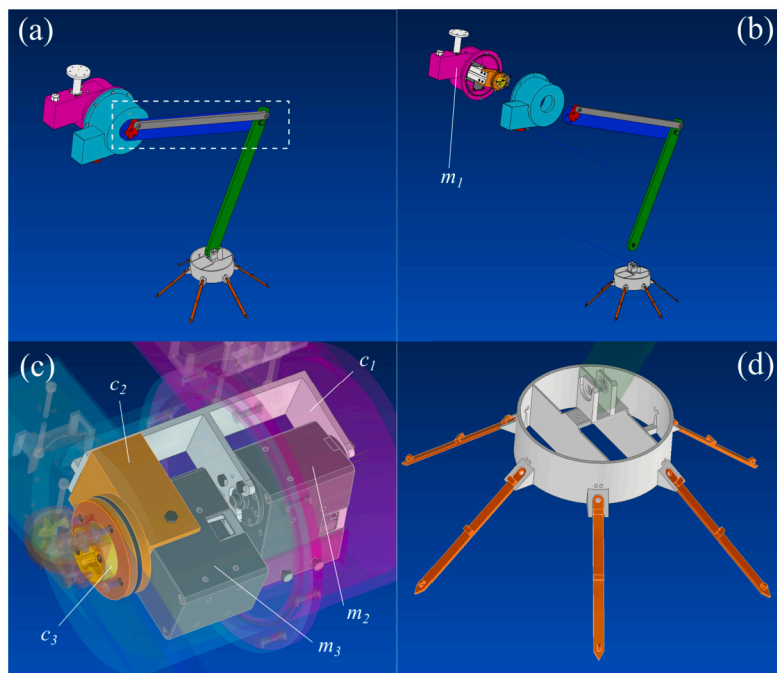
(a) Overview of the RoSC manipulator including the planar four-bar linkage, a shoulder mechanism, and a caging gripper. (b) Exploded view of the RoSC manipulator. (c) Detail of the shoulder mechanism. (d) Caging gripper (net not shown).
